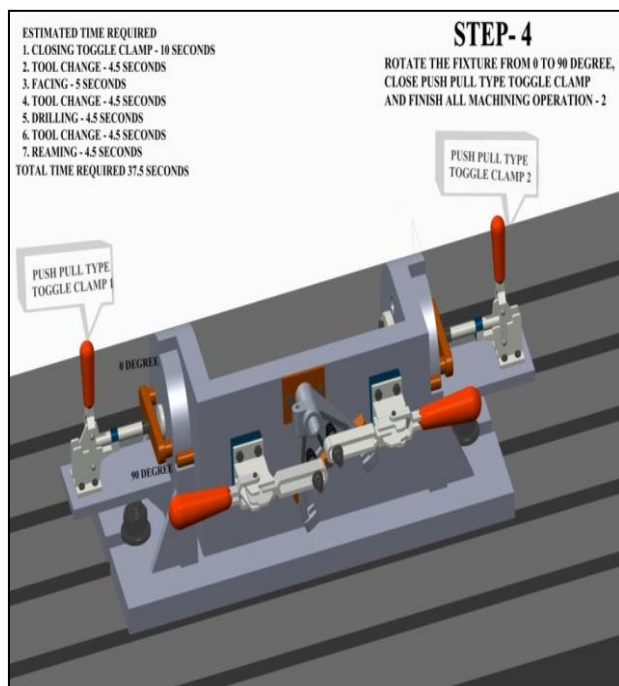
Machine fixture is allow to rotate at 90° for machining operation -2
